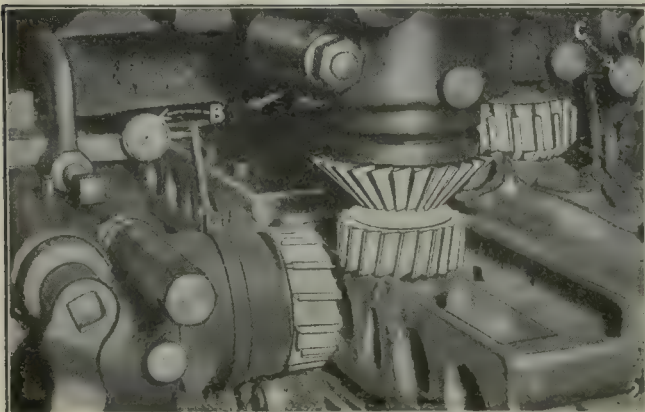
MILLING TOP, SIDES AND BOTTOM
